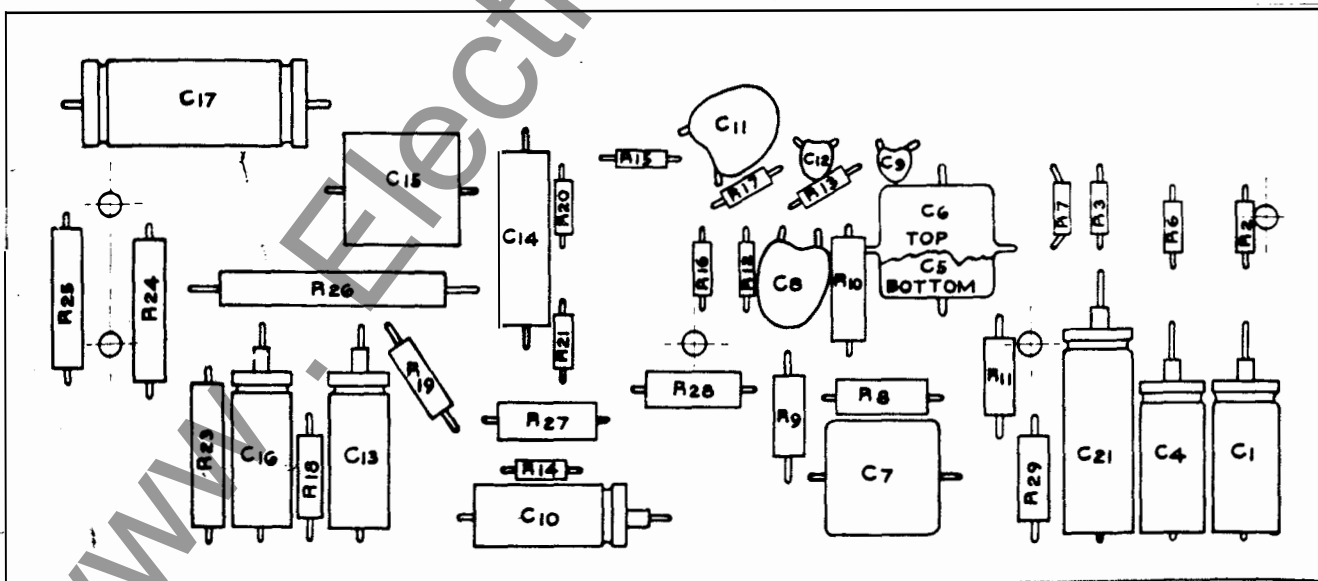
COMPONENT SIDE OF PRINTED CIRCUIT BOARD
